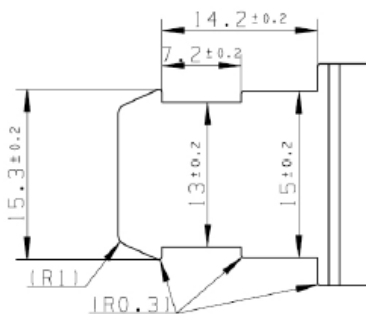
Recommended FTV Mounting Tab Dimensions (3 mm  $\pm$  0.1 mm thick)
